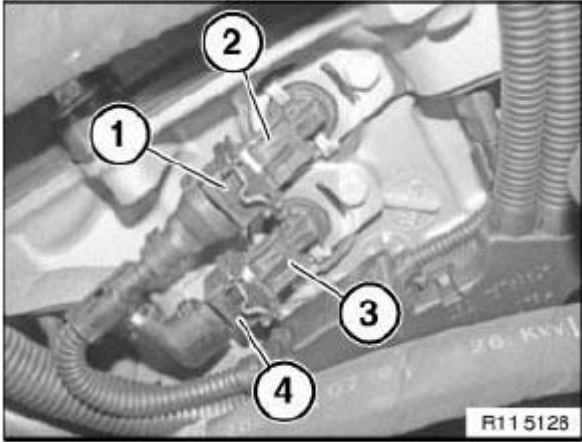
Identifying Plug Connections Of Solenoid Valves
